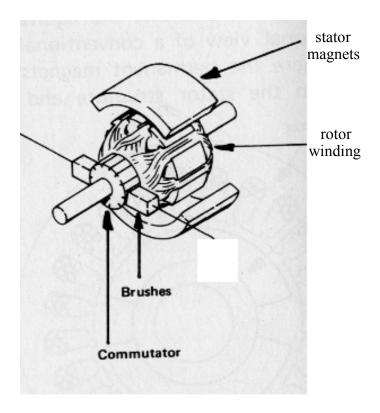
Exploded view of a dc motor; source: Engineering Handbook by Electro-Craft Corp.
